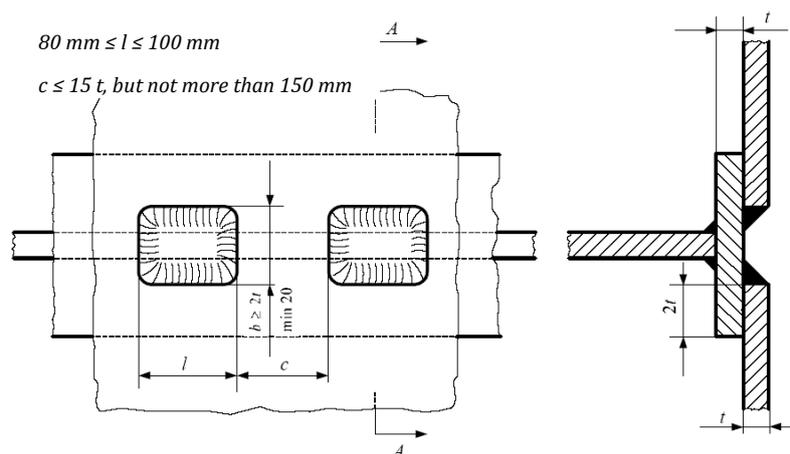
Slot weld with backing
